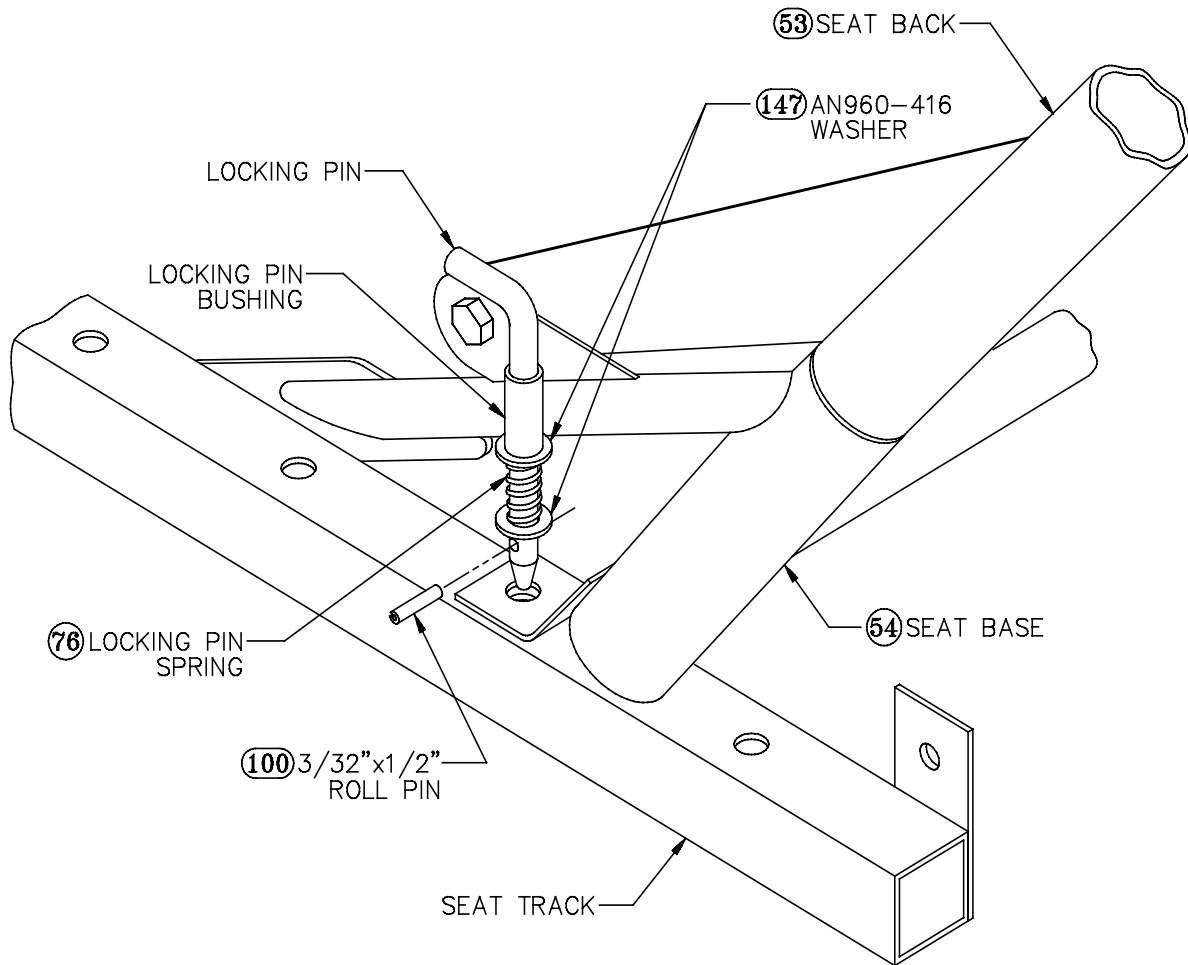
Assembling the Seat-Back Adjustment Locking Pins
